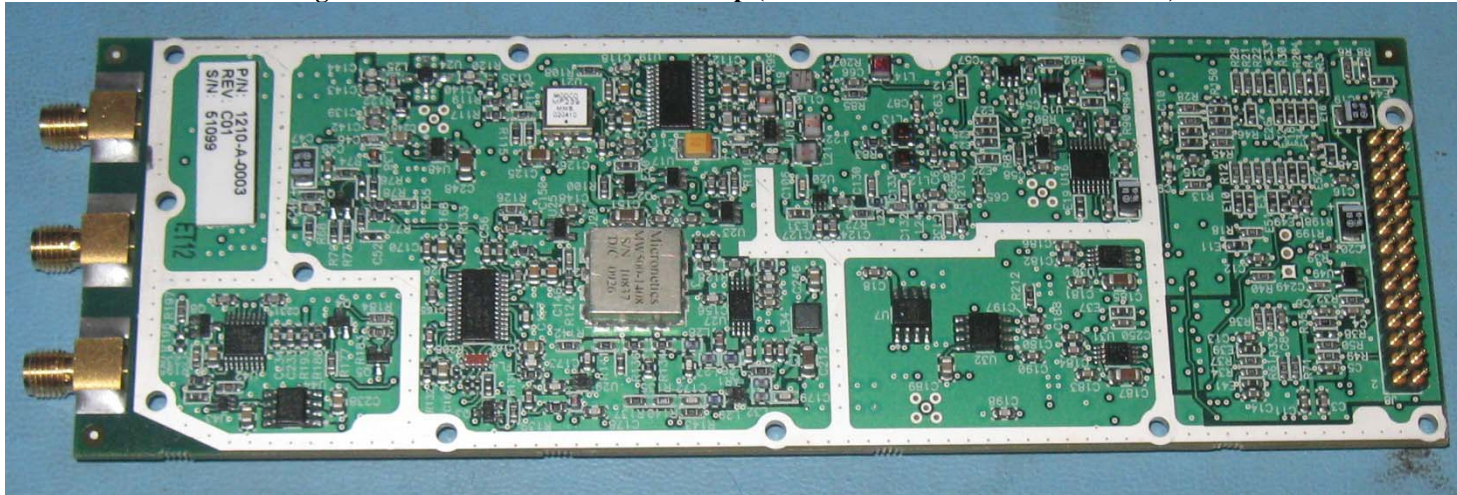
1210-A-0003 RF Module Bottom (Part of the BGAN 1 Channel Cards)
